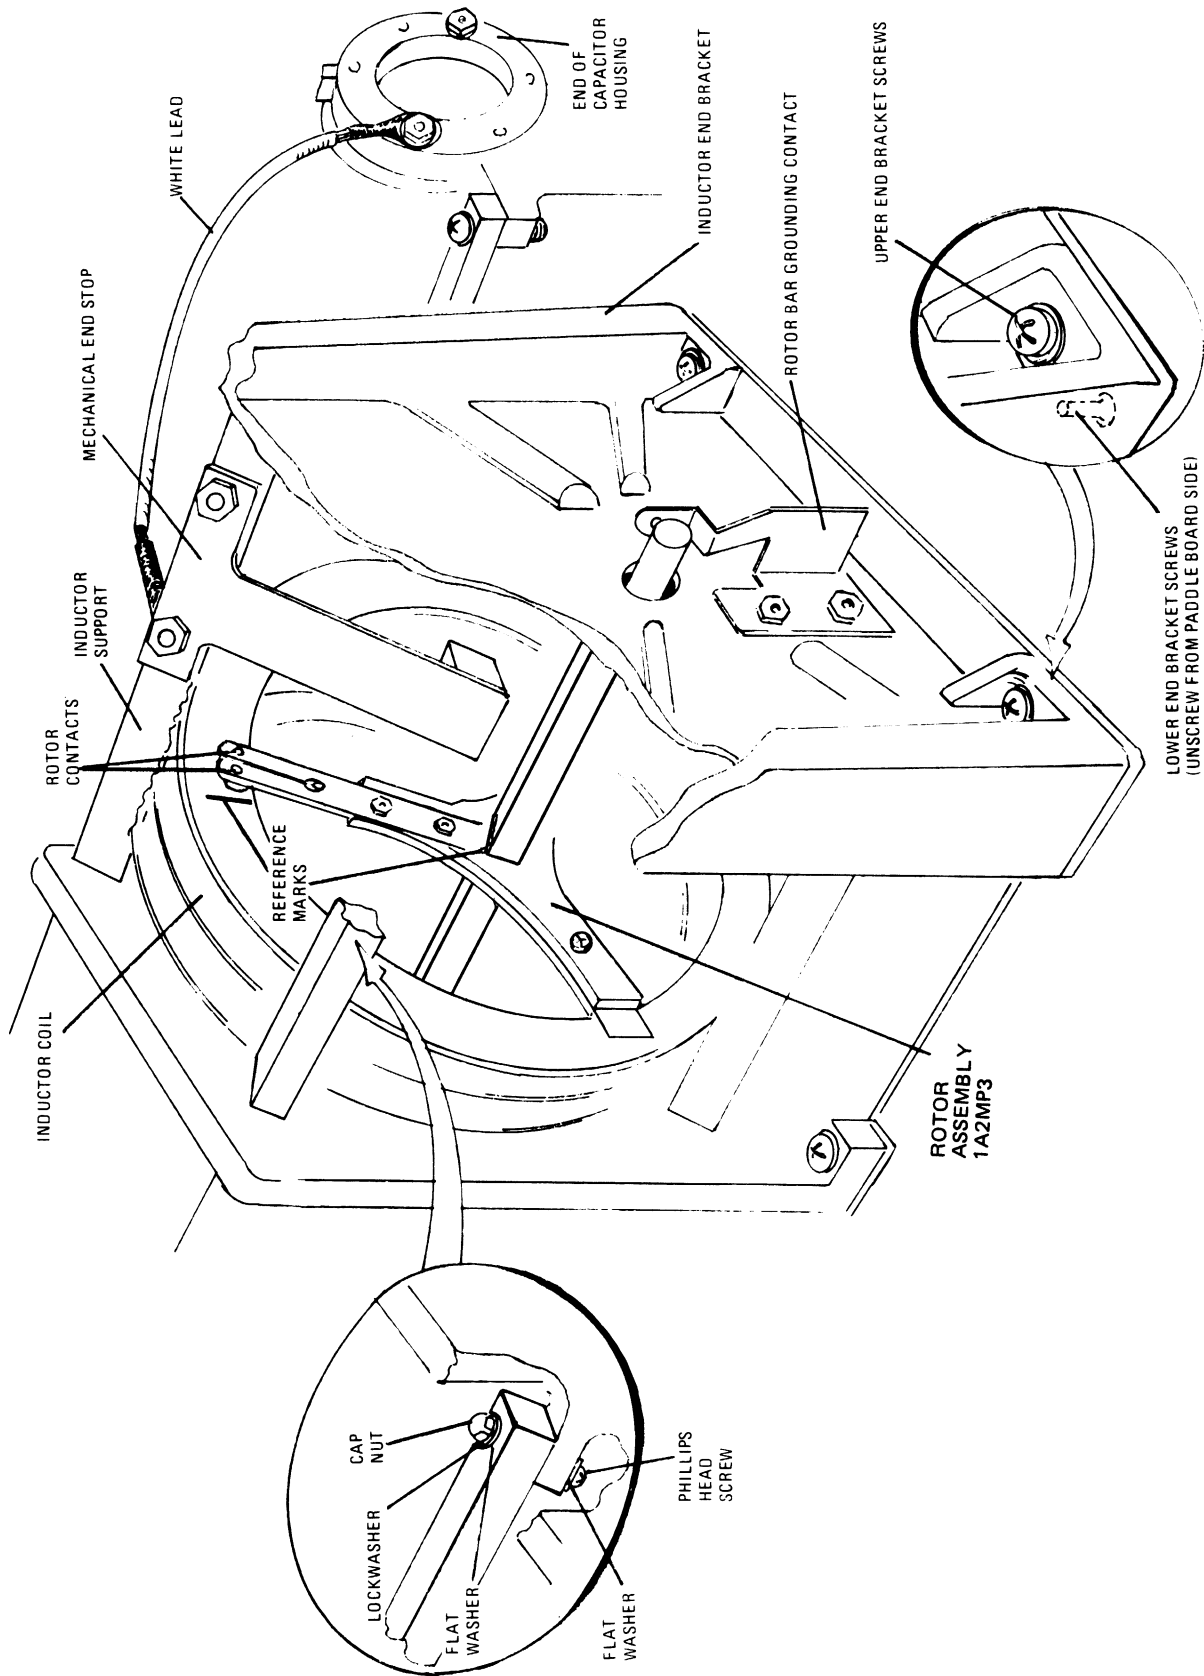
A. Inductor Assembly 1A2L1 Detail View
